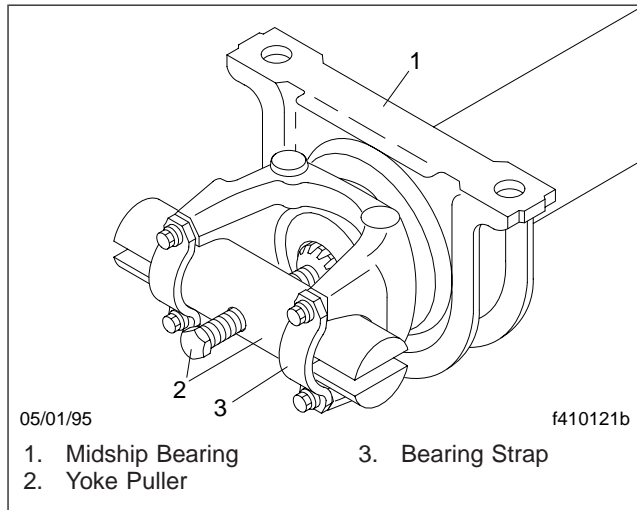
, Remove a Half-Round End-Yoke from a Coupling Shaft
